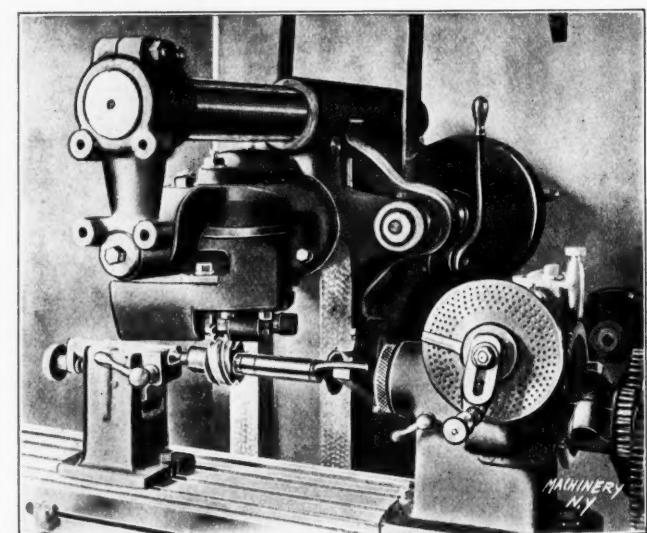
Cutting a Spiral of Short Lead on the Plain Milling Machine, an Operation Impossible on the Universal Machine without Special Attachments.
